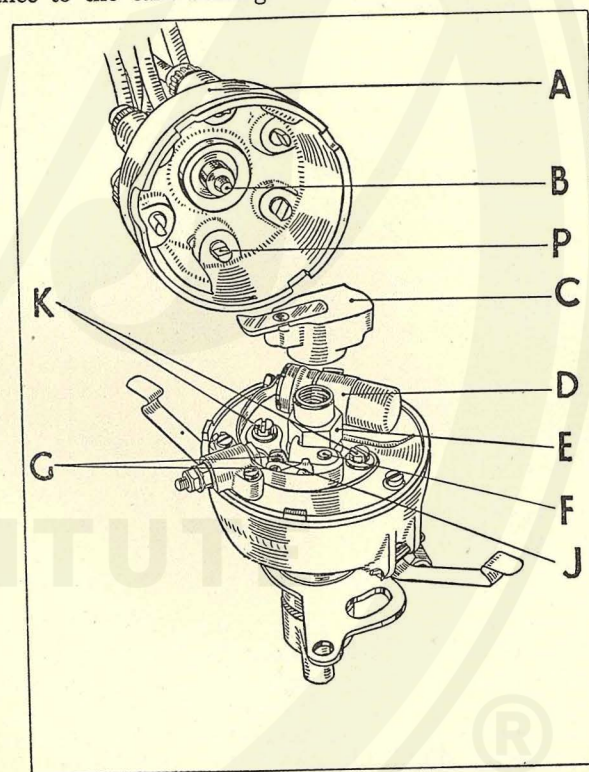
Distributor. A, distributor moulding; B, carbon brush; C, rotating arm; D, condenser; E, cam; F, pivot; G, contact points; J, gap = .012"; K, screws for contact plate; P, electrodes.
